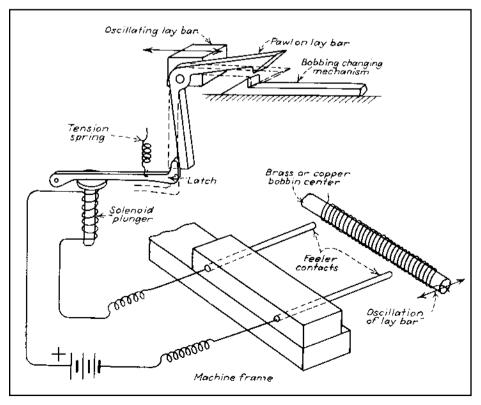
Bobbin changer. When a bobbin is empty, the feeders contact the metal bobbin center, completing the circuit through a solenoid which pulls a latch. That causes the bobbin-changing mechanism to operator and put a new bobbin in the shuttle. As long as the solenoid remains deenergized, the pawl on the lay bar is raised clear of the hook on the bobbin-changing mechanism.
